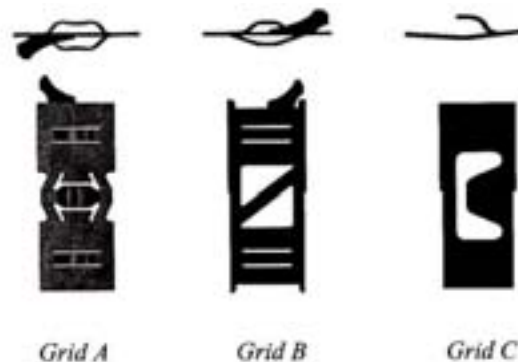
Spring and dimple configurations of Grid Designs A, B and C.
